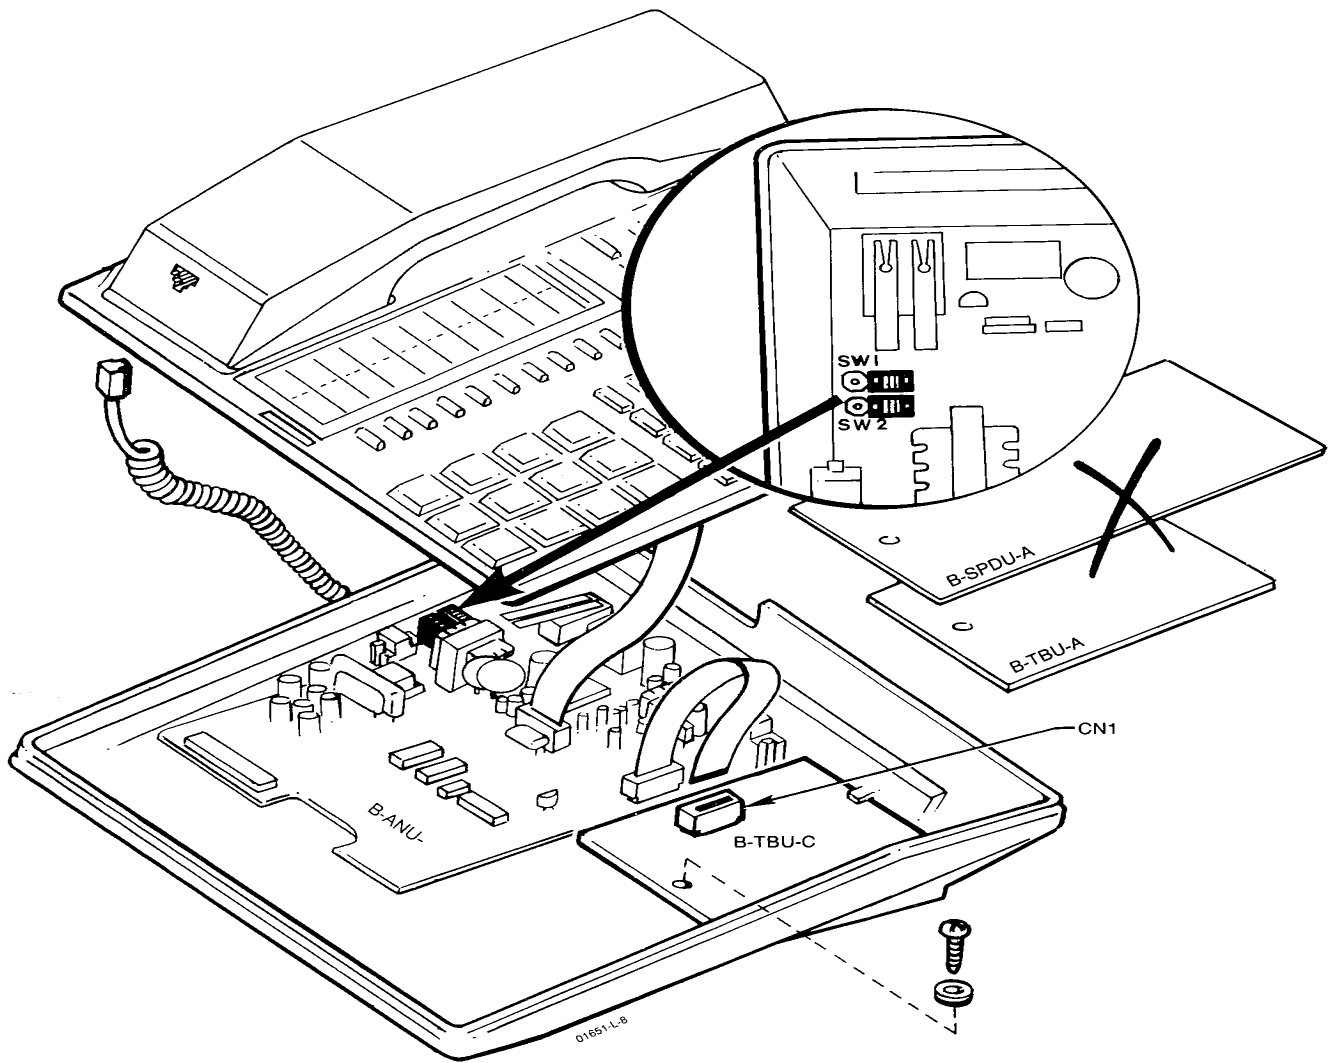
INSTALLATION OF B-TBU-C PCB
